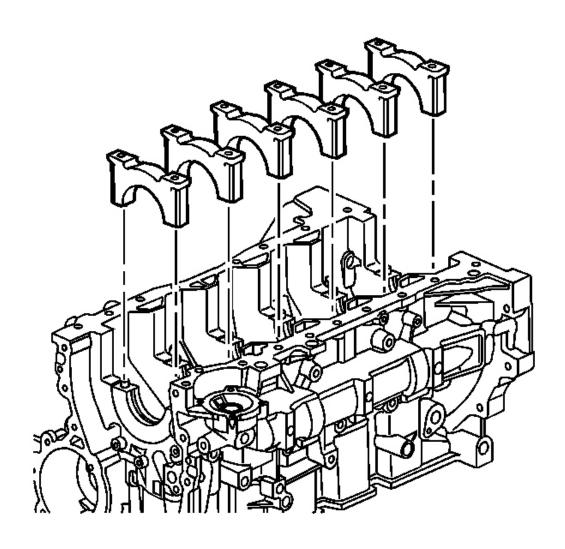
View Of Crankshaft Bearing Caps Courtesy of GENERAL MOTORS CORP.
